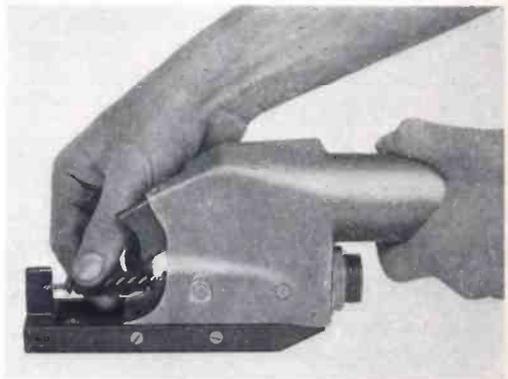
Insertion or removal of the brush is simplified by a movable outer bearing and a push spring socket in the chuck
